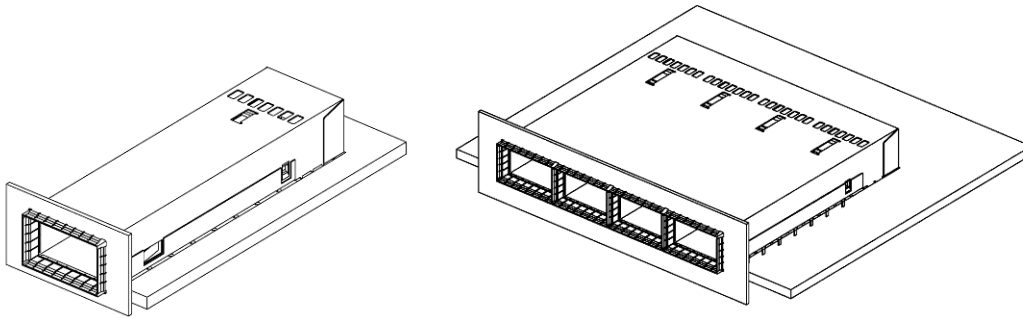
1x1 and 1x4 Cage, host PCB and panel
